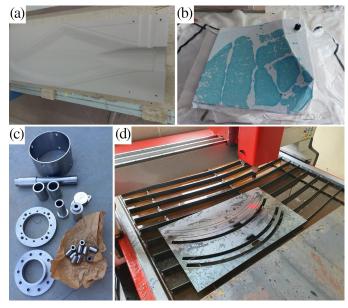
Wind turbine components: (a) rear blade form, (b) turbine blade, (c) generator components, (d) rotor components
